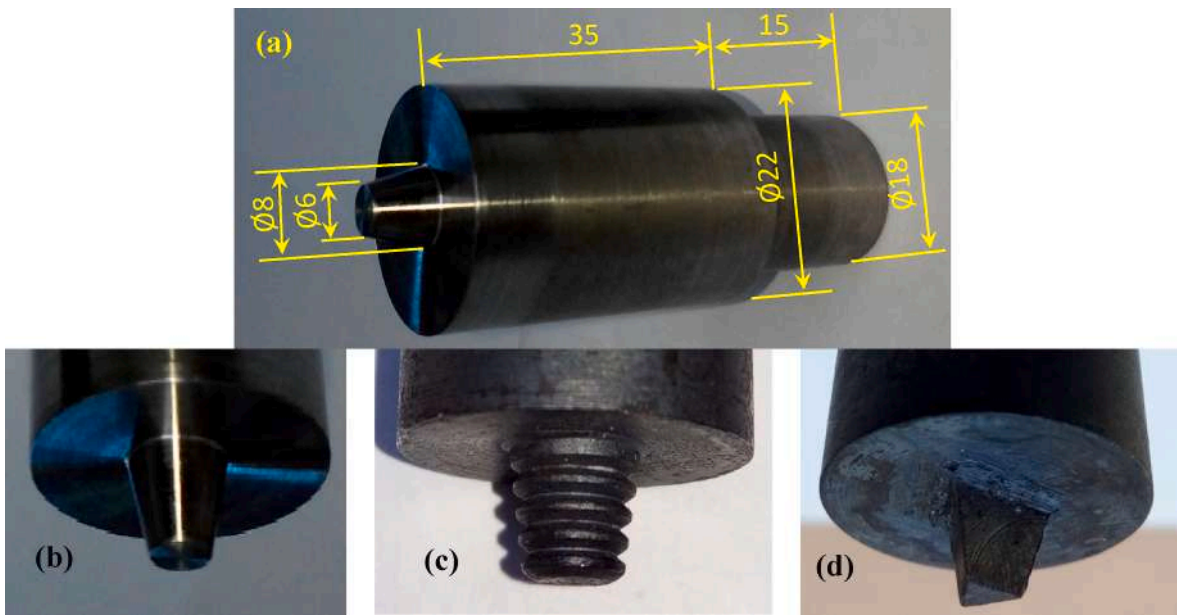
Tools dimension and geometry of the tool pins; (a) Tools dimension, (b) Simple, (c) Threaded, and (d) Truncated triangular pyramid.
